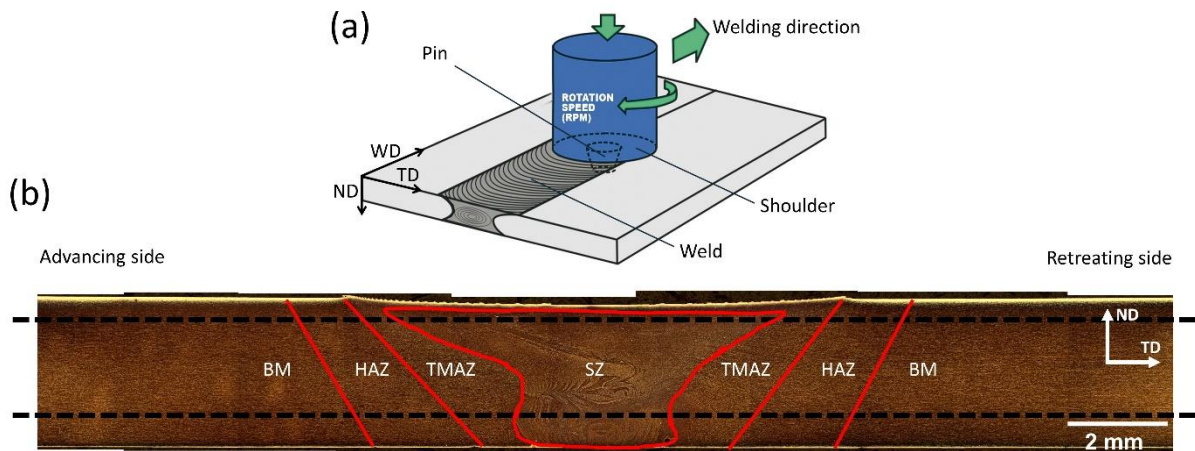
(a) A schematic representative of FSW process. (b) Morphology of an FS welded Al/Al joint using 1600 rpm and 250 mm/min.
